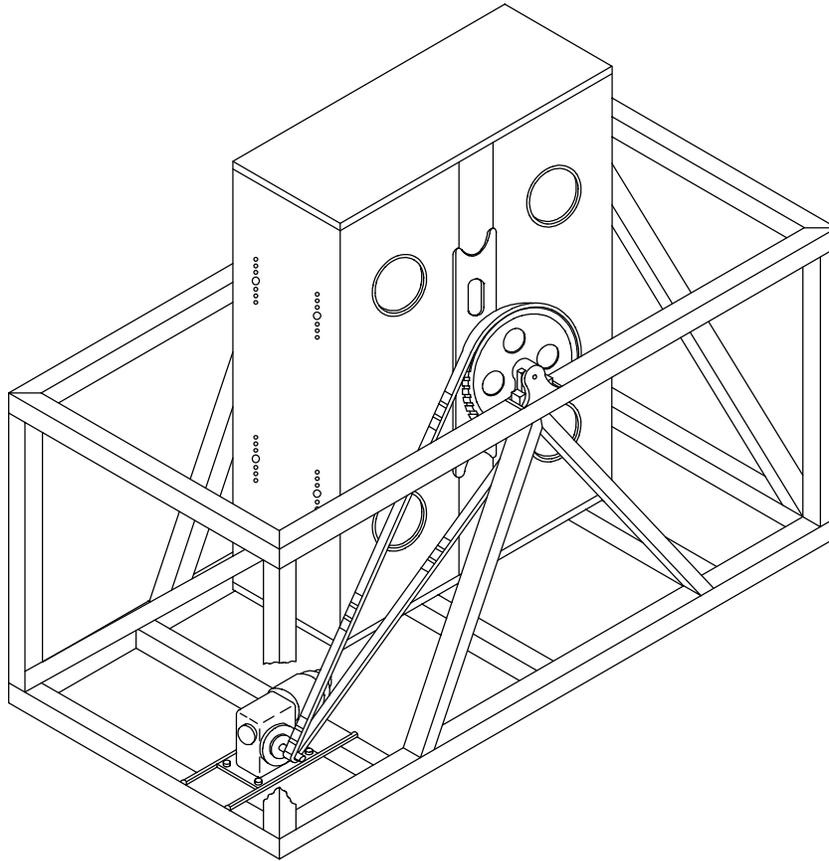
Typical assembly of four-cage random-drop-test machine.
